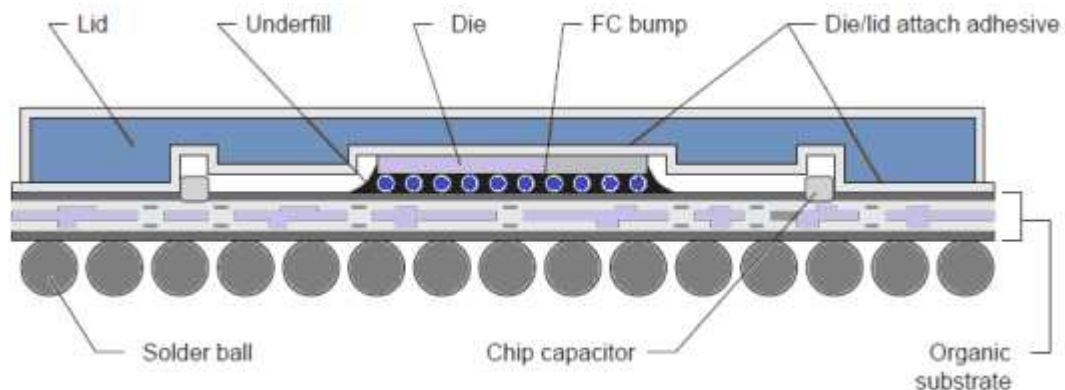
Typical Flip Chip BGA Package (source: TEXAS INSTRUMENTS, 2005)
